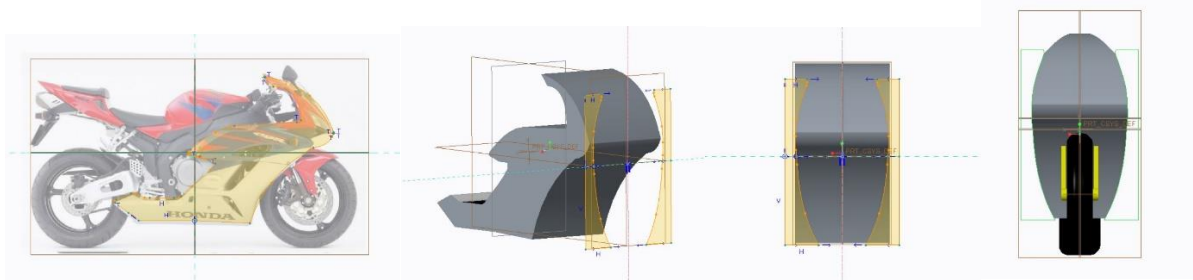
Sketch-Up (Using Side View) → Extrude → Carve (Using Front View) Design Process in Pictures.
